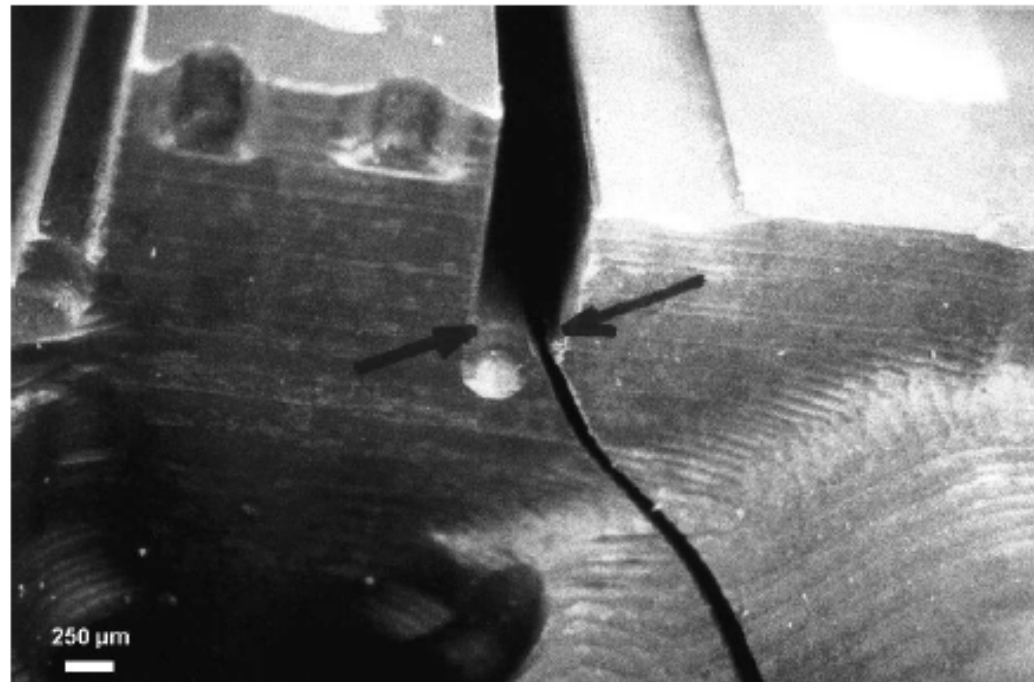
Stress relieved crack of a die casting die of steel grade X38CrMoV5-1 (steel number 1.2343) following a sharp edged groove.
